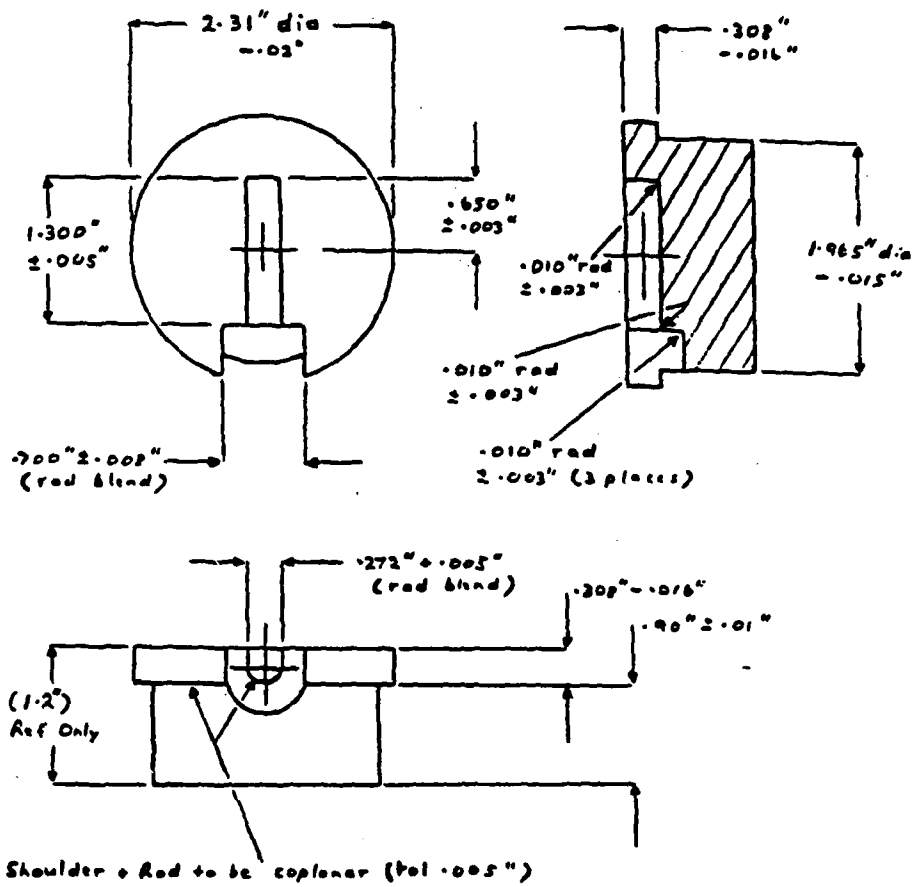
Radial pressure bar - pellet holder (front) Type B.
